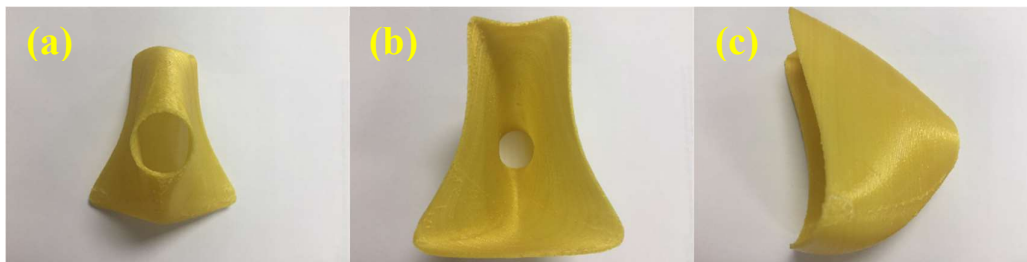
3D printed customized Full-face mask frame front view (a), back view (b), and lateral view (c)
